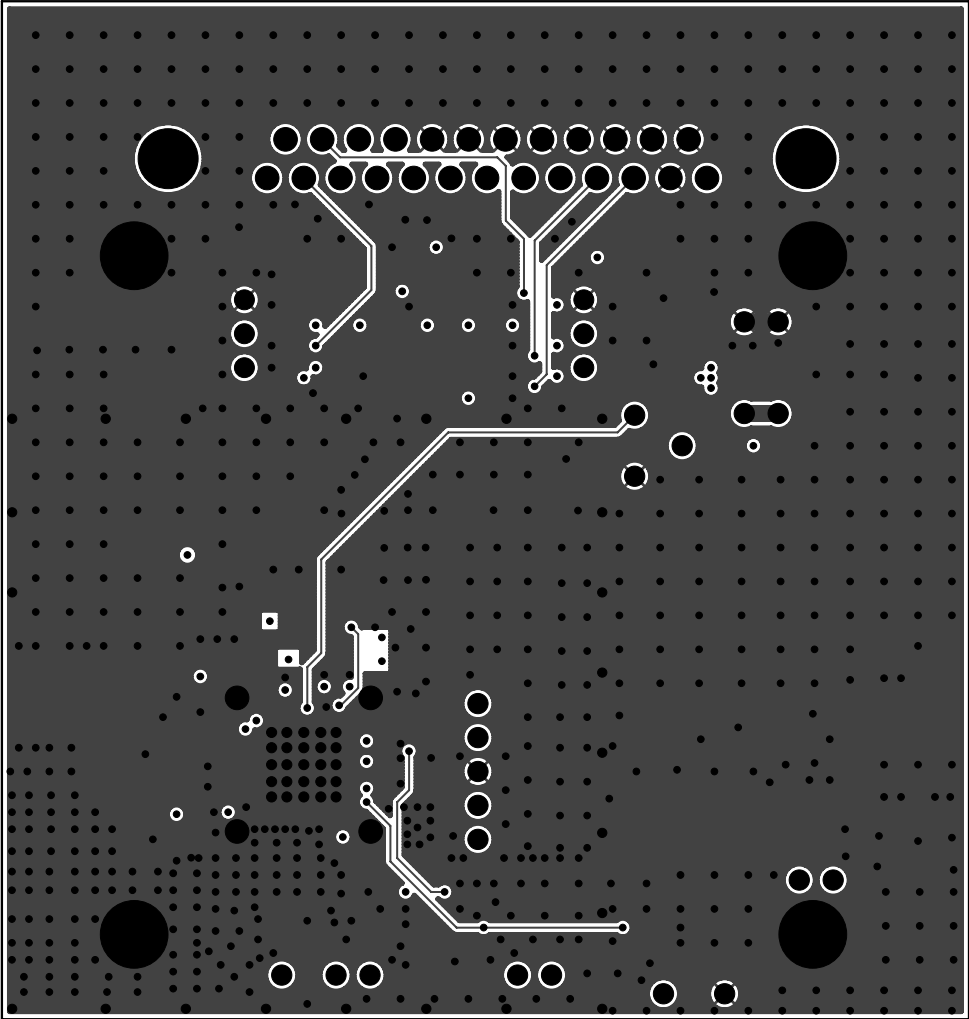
MAX3541/MAX3542 EV Kits PCB Layout—Inner Layer 3
